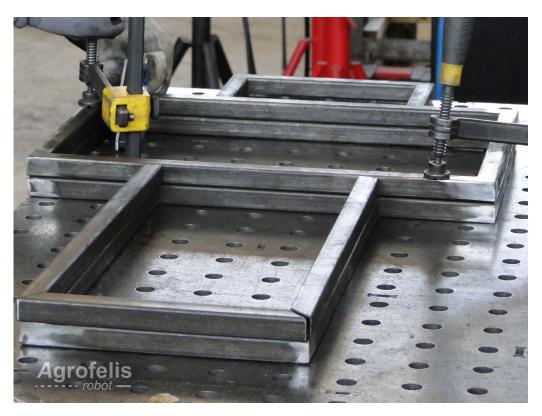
Manufacturing the frame step 3, fabricated bottom and top parts aligned
